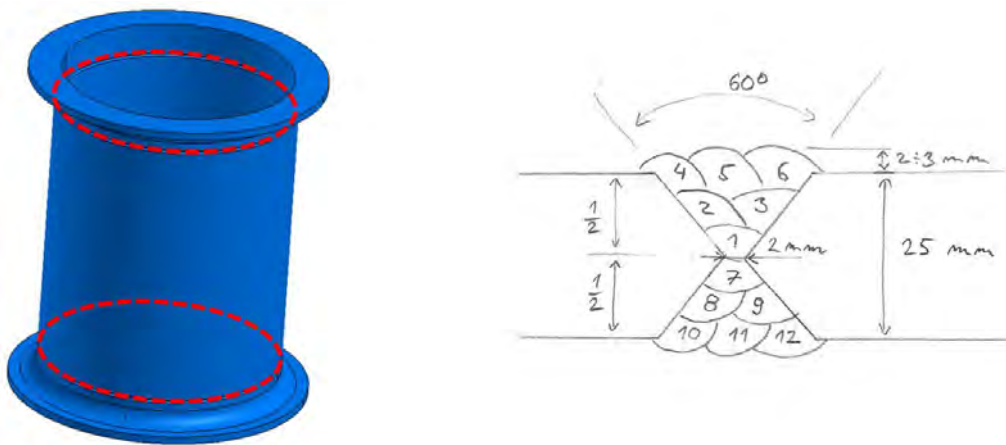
Circumferential welds of the inner sub-assembly, the corresponding bevel shape and layout of weld passes
